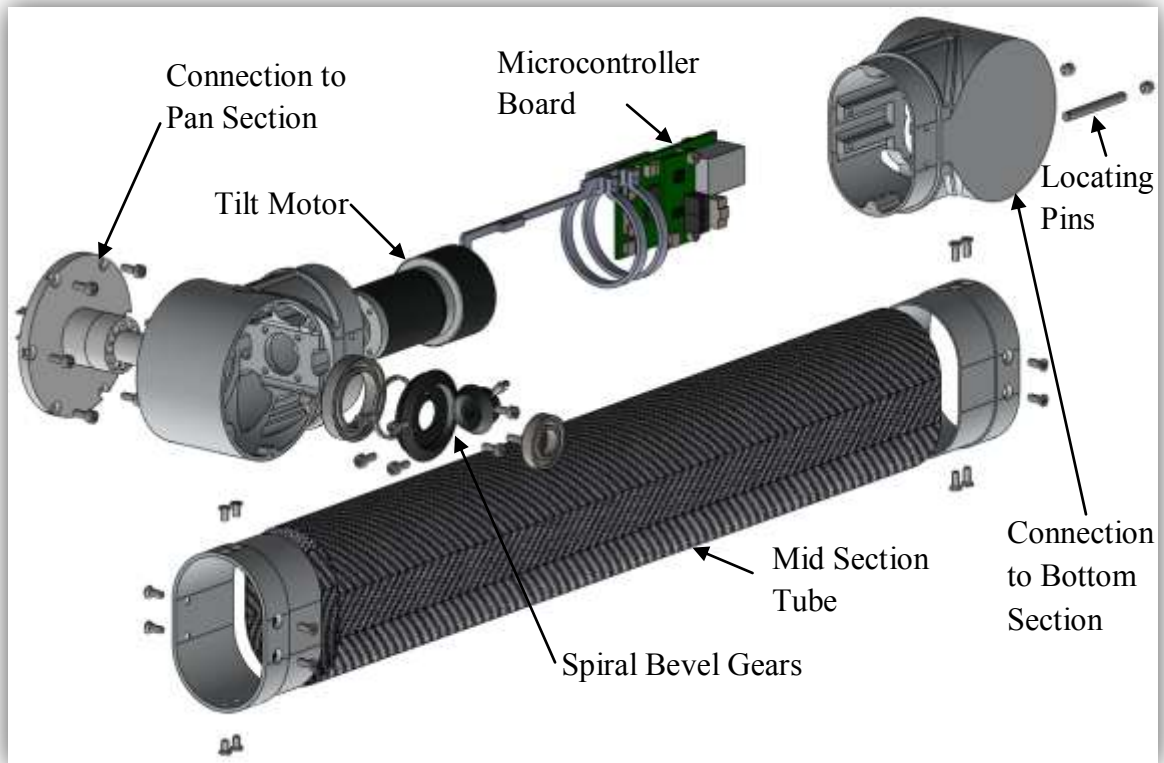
Exploded View of Mid Section of Manipulator Arm
